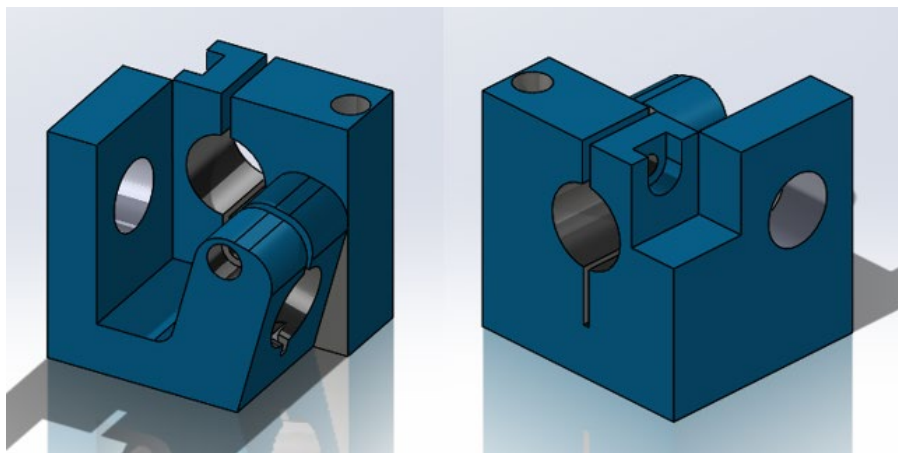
SolidWorks Rendering of Galvanometer Mount (front and back)
